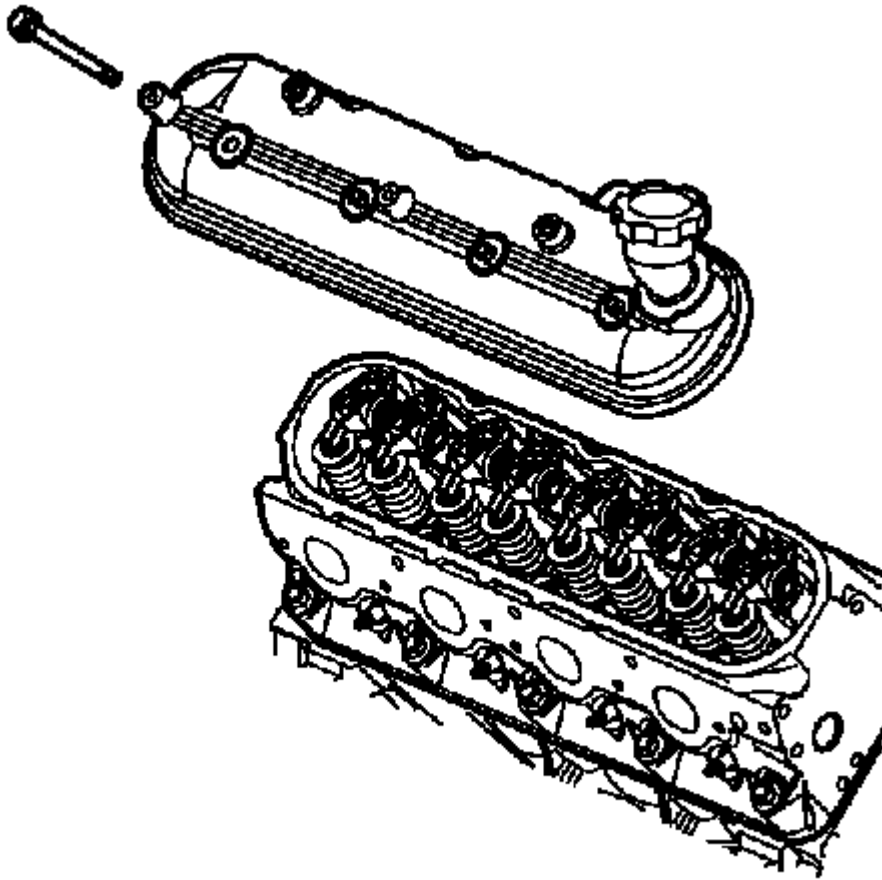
View Of Valve Rocker Arm Cover & Bolts (Right)
